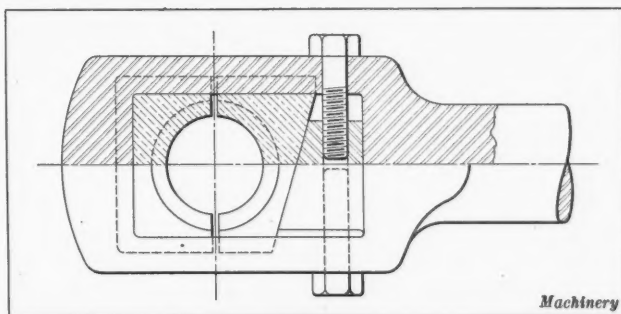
Example illustrating Screw and Wedge Adjustment for Bearings
